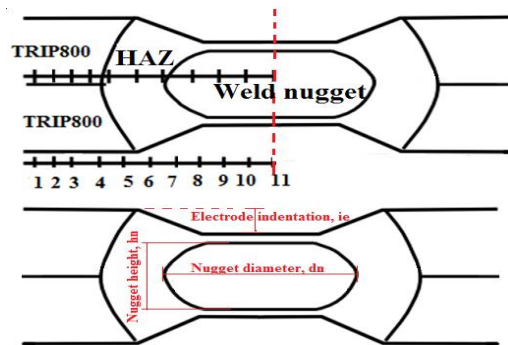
Microhardness measurements and weld geometry profile.
